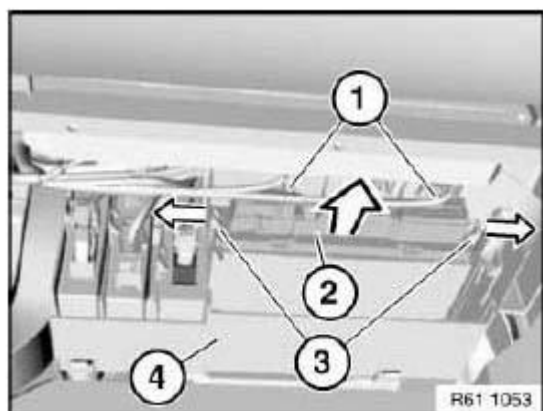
Identifying Equipment Carrier, Plug Connections And Catches
